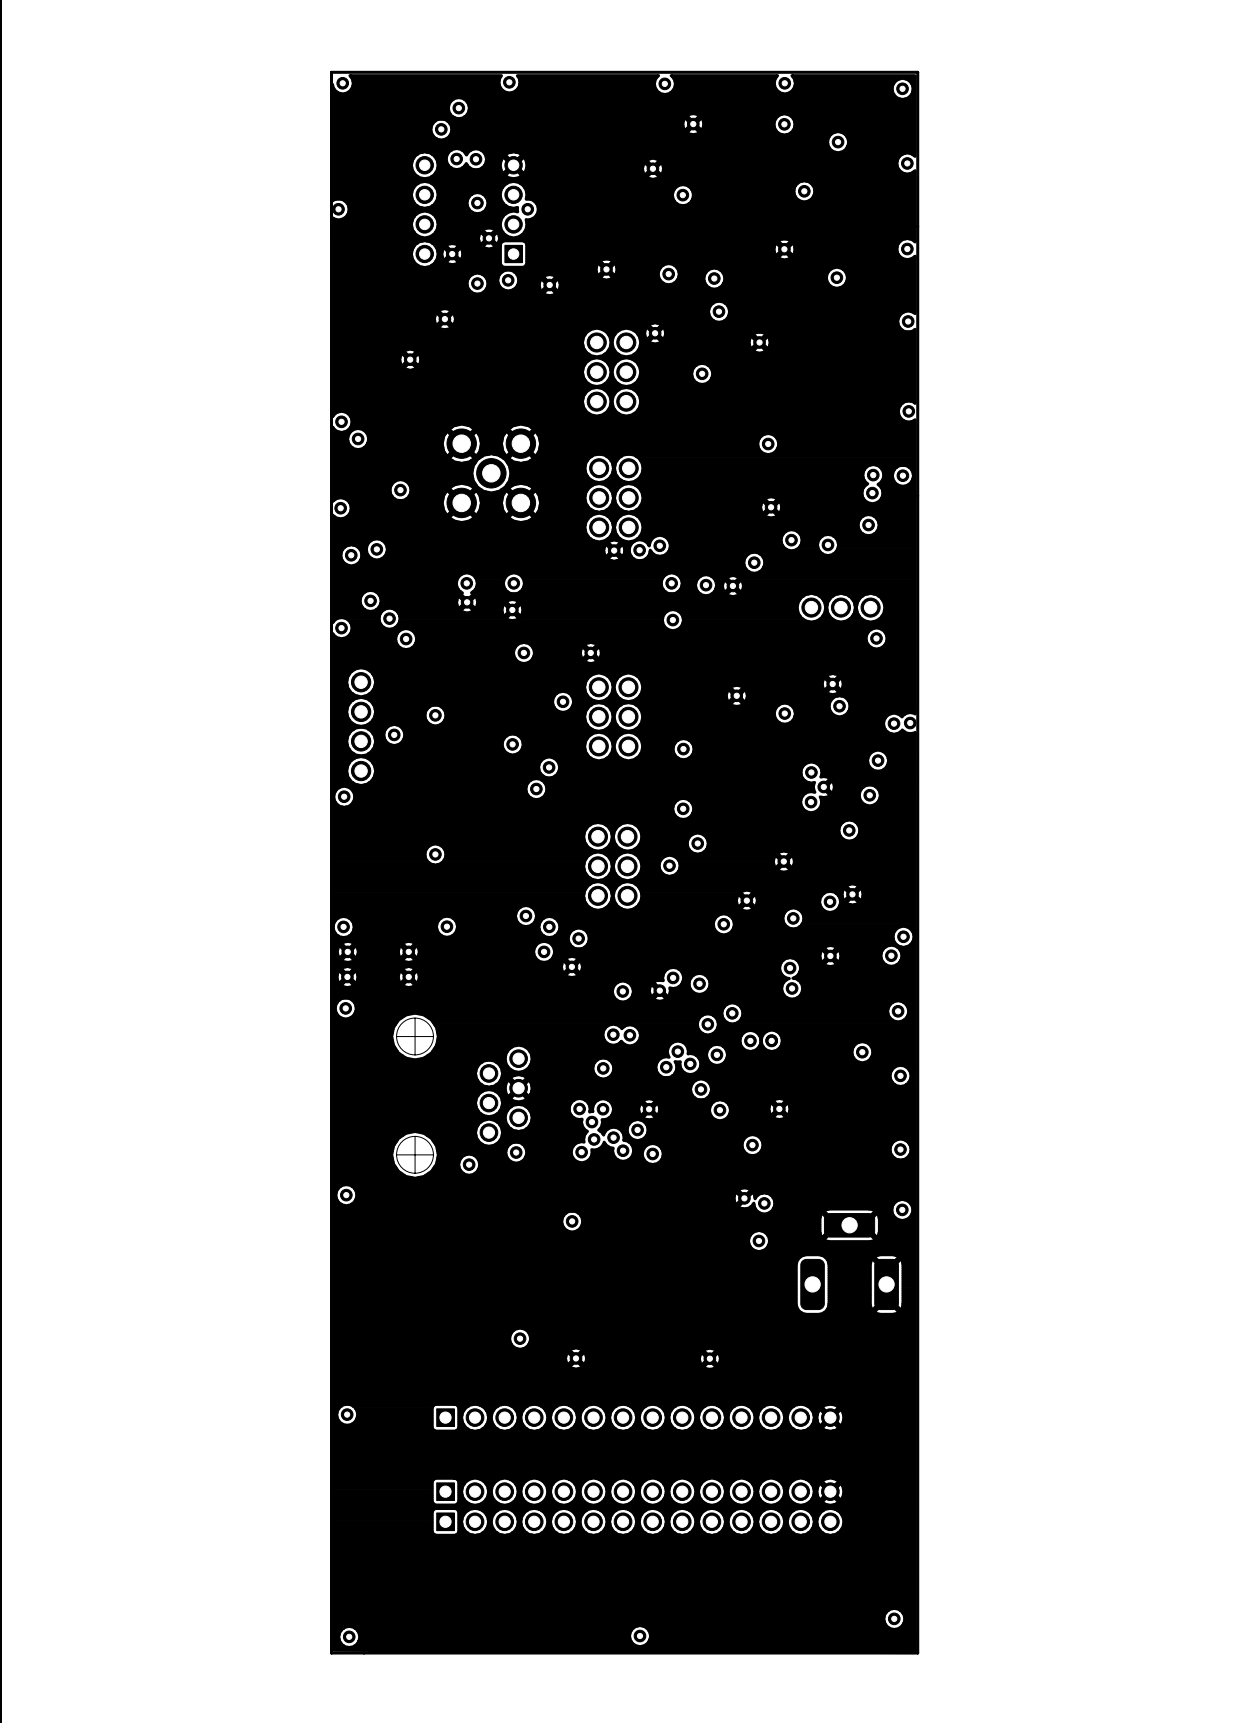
BOARD LAYOUT - BOTTOM LAYER
